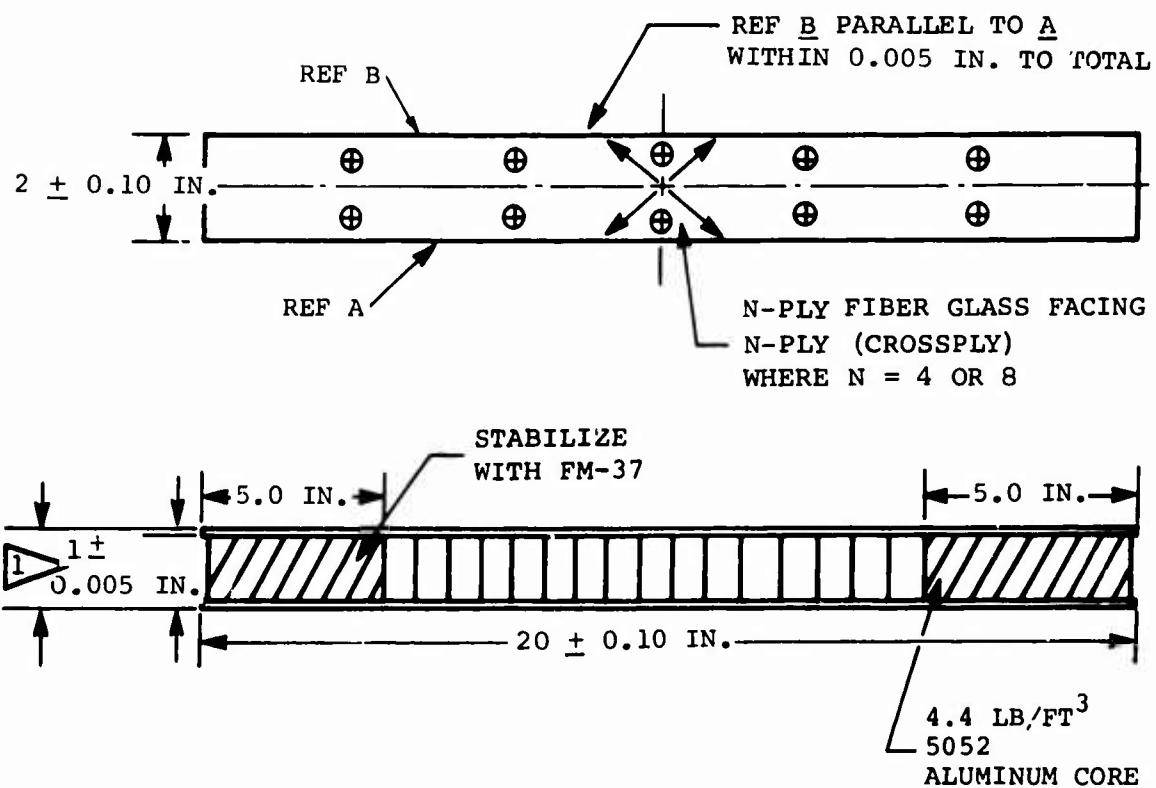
Sandwich Specimen ± 45 Degree Crossply Fiber Glass Facings.
